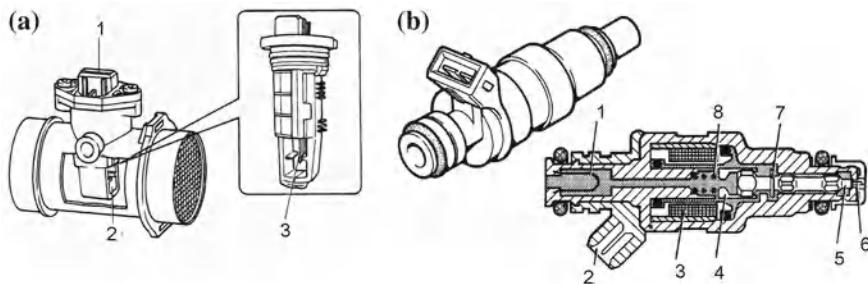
Main injection components. a Air mass meter and b pintle shaped injector (courtesy of Bosch)
